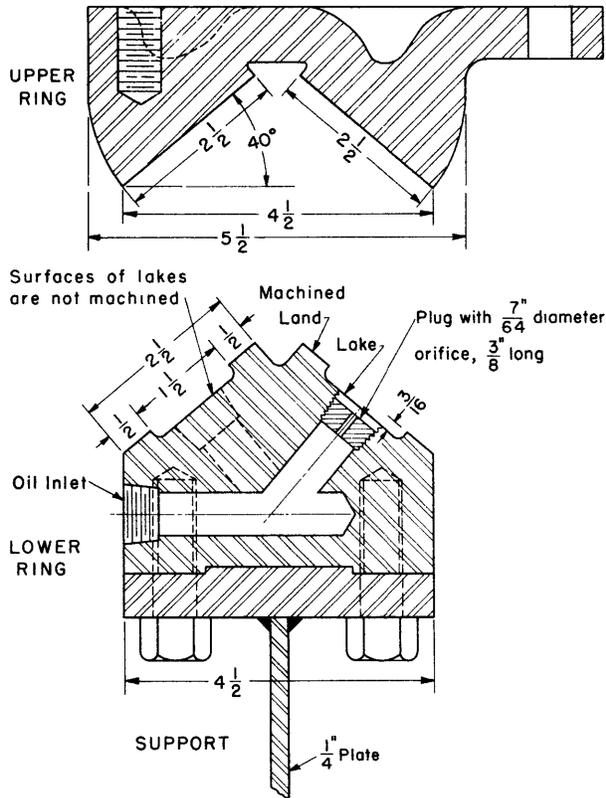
Vertical Transverse Sections through Upper and Lower Bearing Rings of Third Model
